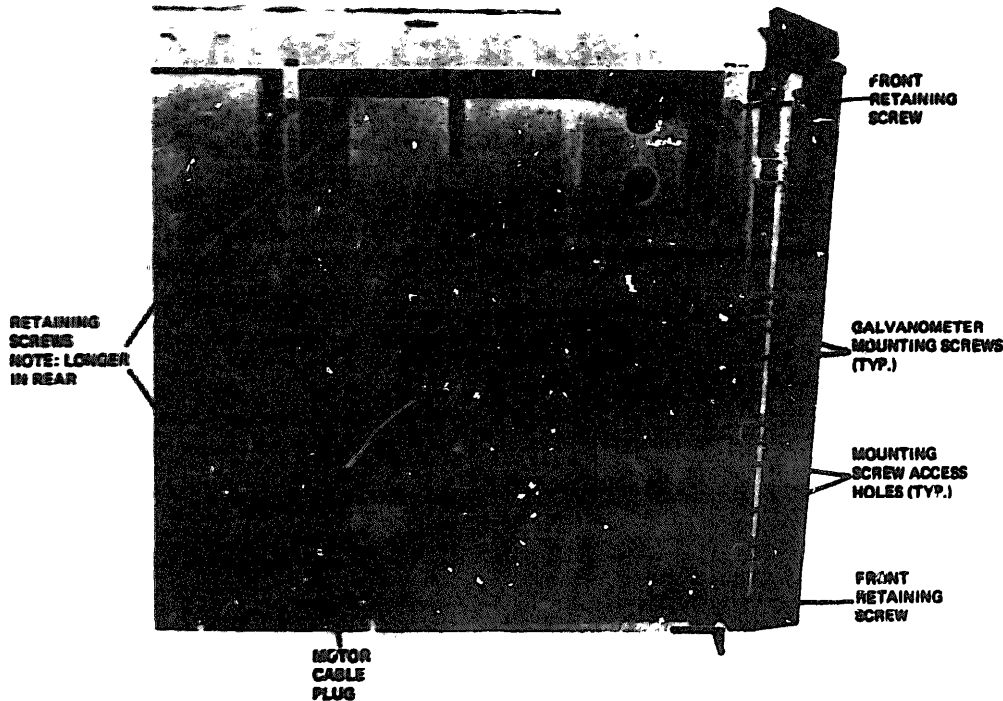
Drive Unit and Galvanometer Mounting Screws
